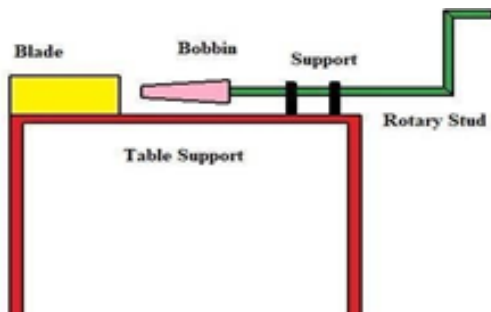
Concept of Bobbin Thread Removal Mechanism
